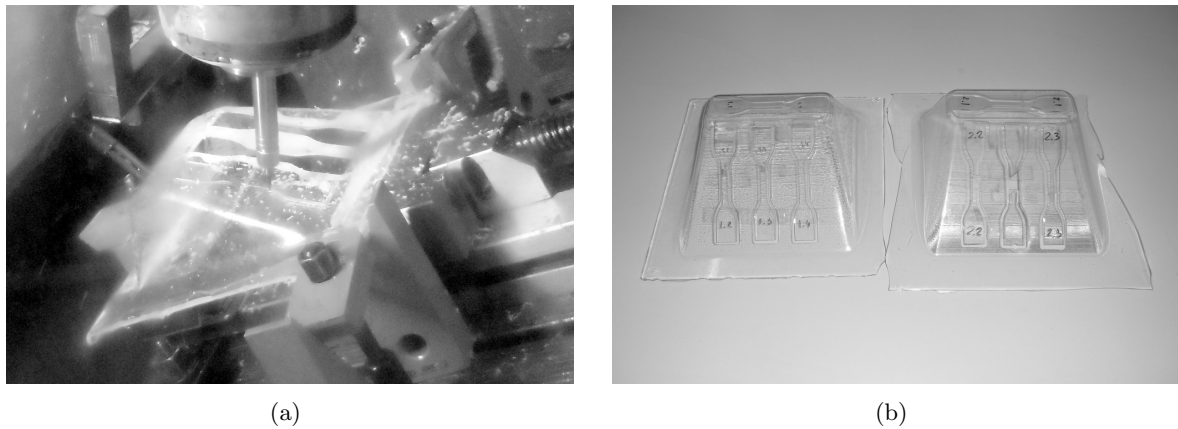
Thermoforming parts specimens: (a) cut of the part formed with the SPIF mould; (b) parts with specimens after tensile tests
